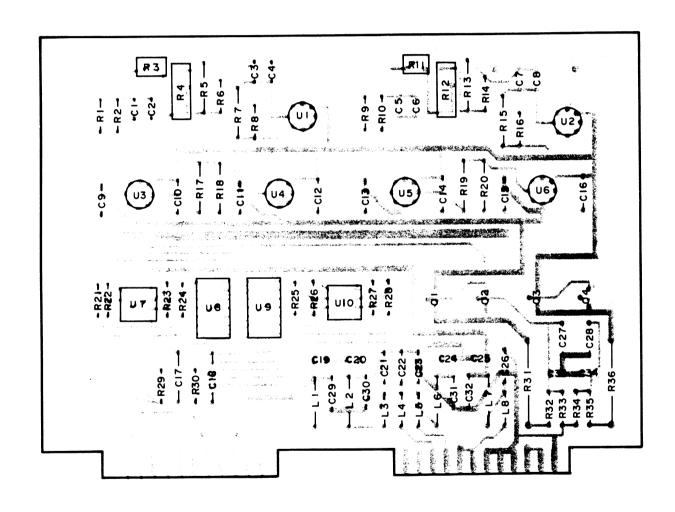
Al2 IF BPF Board Assembly Component Locations.
